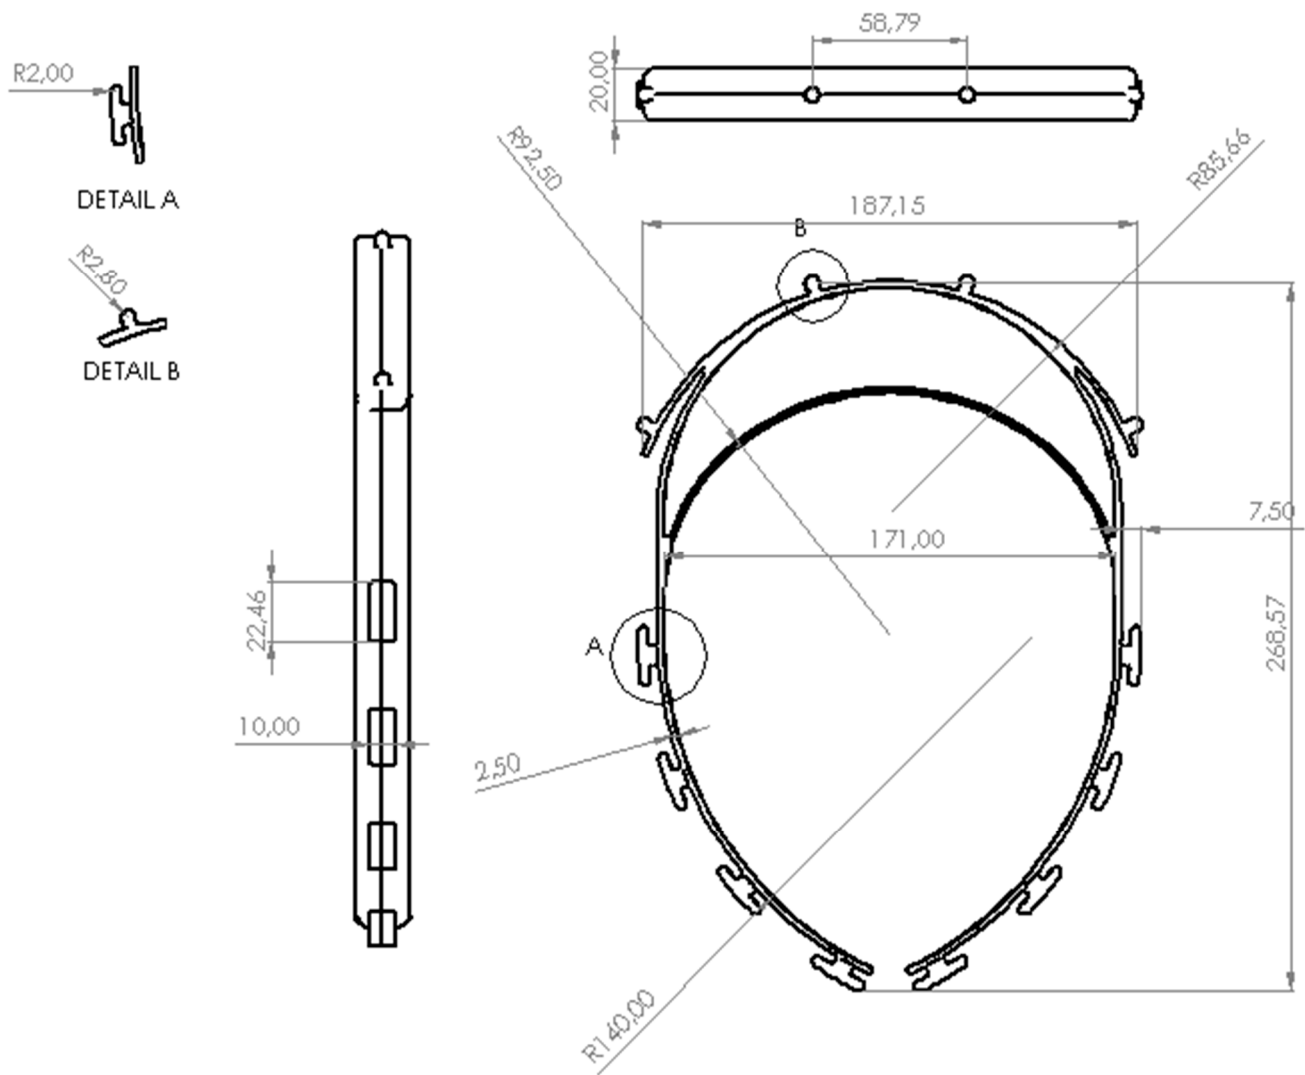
Technical drawing of protective helmet body design for Injection molding production method.
